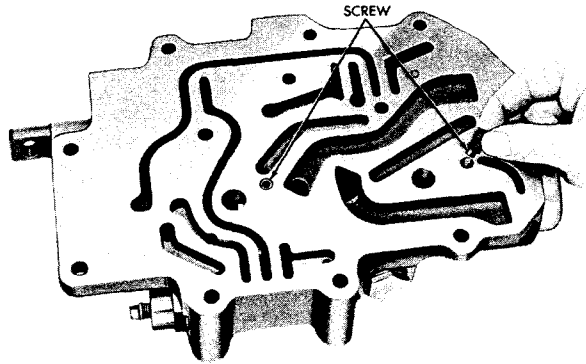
Removing or installing socket head screws from range selector valve body
